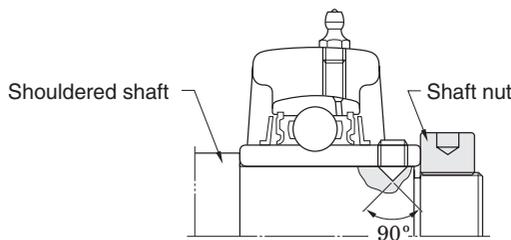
Example of installation with a shouldered shaft and shaft nut
